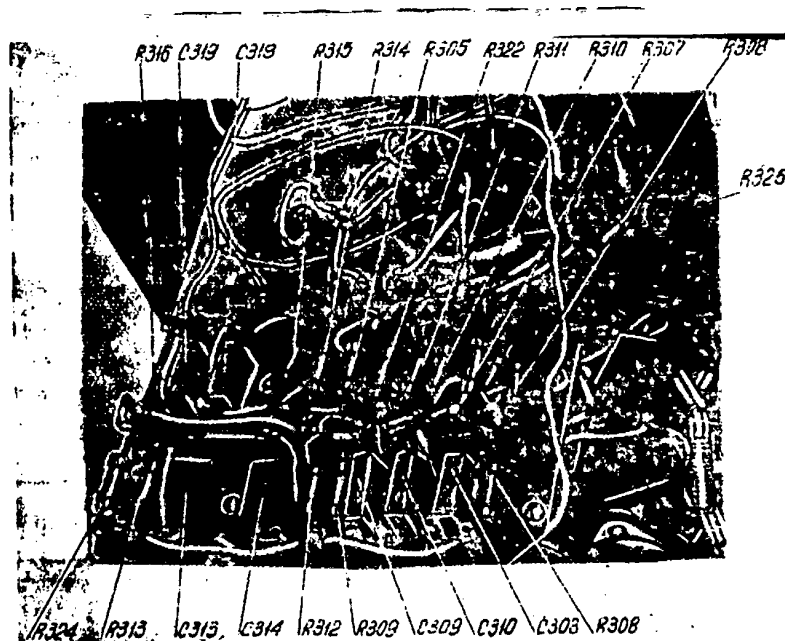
Location of components on the crystal oscillator chassis / bottom view.
